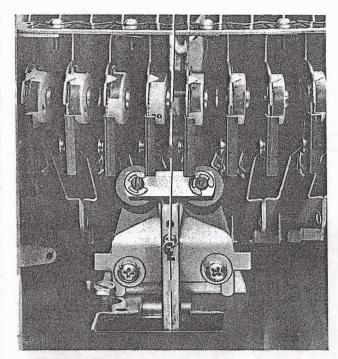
CENTER LINE FOR BACK STOP PAWL SETTING
